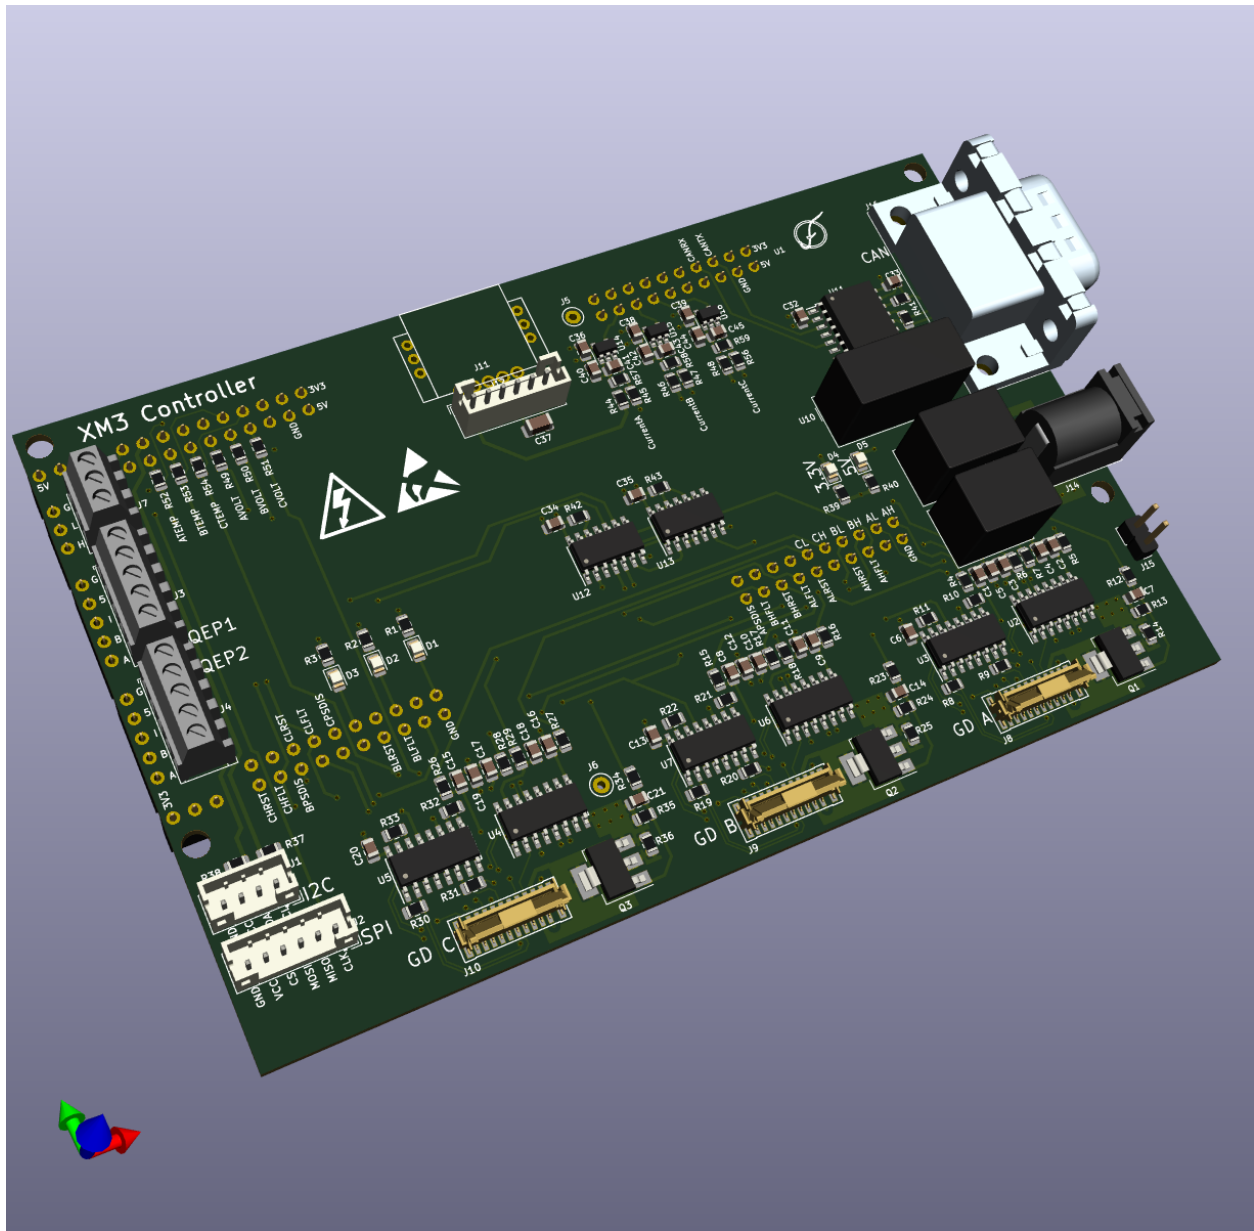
Rendering of Controller PCB as Generated in KiCad
